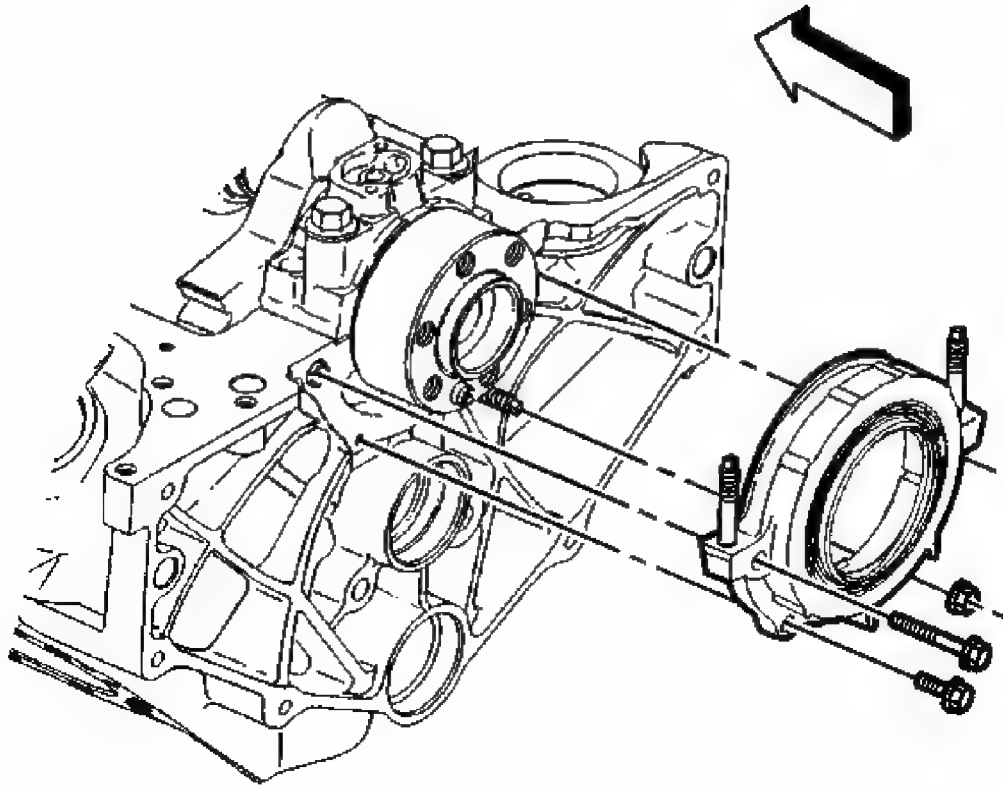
View Of Crankshaft Rear Oil Seal Housing
